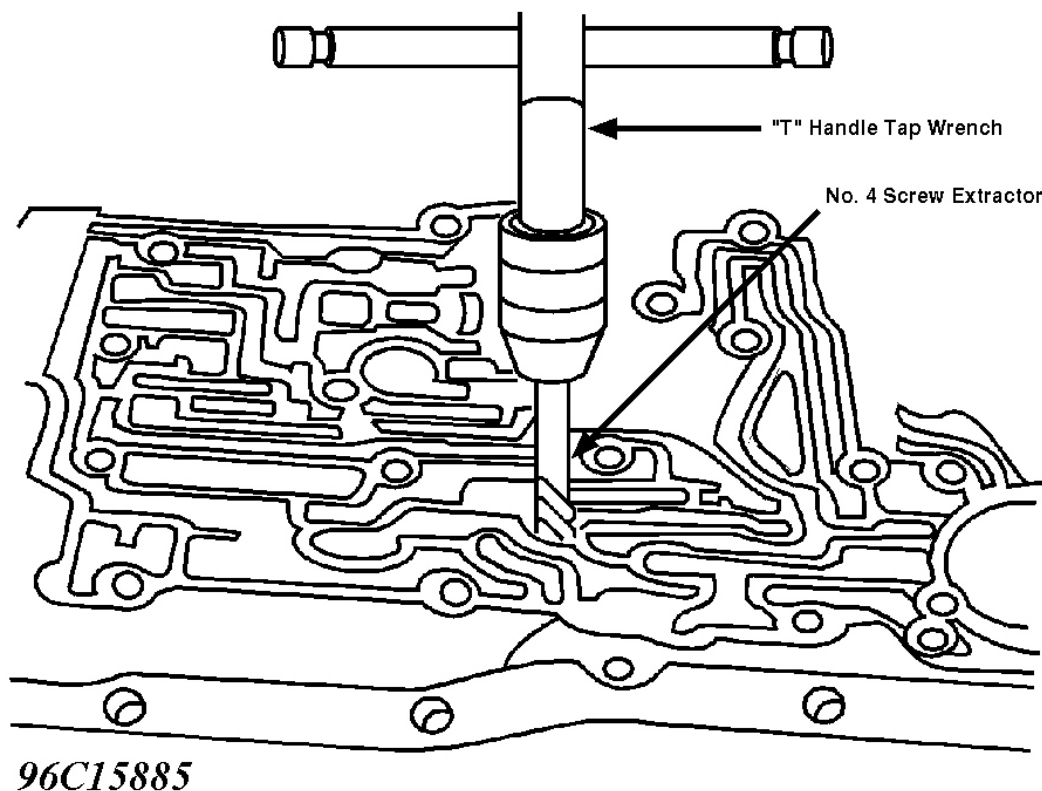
Removing 3rd Accumulator Check Valve Assembly
